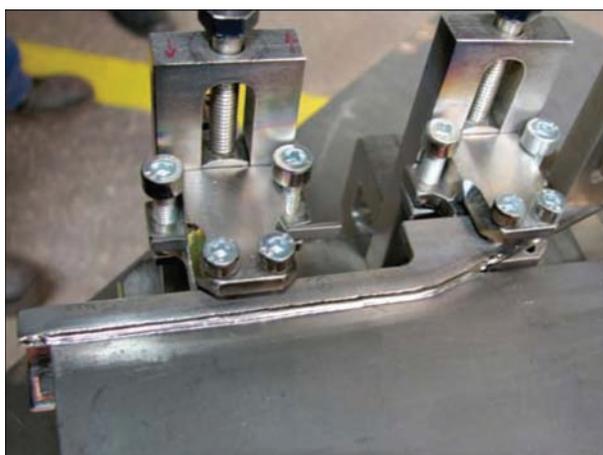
EBW joint of blade airfoil with extended repair «welded-in piece» in assembly-welding fixture
